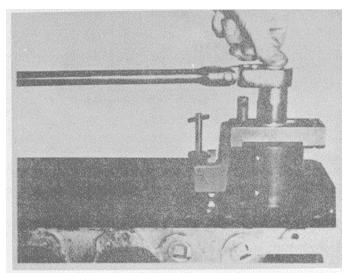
Regroove cylinder head. (b) Remove 0.005/0.006 inch material at
